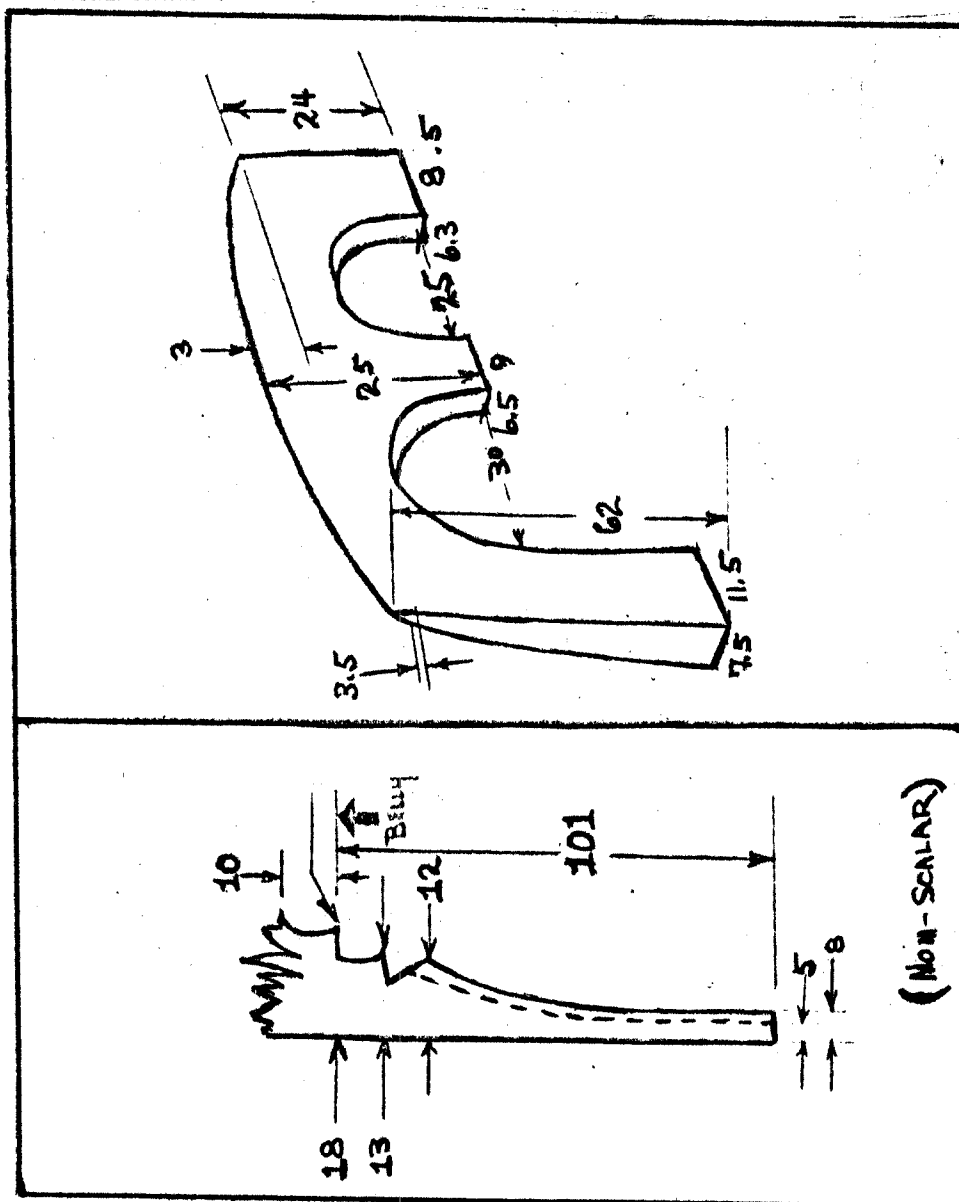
Detail, lower end of fingerboard (left); bridge: London Chanot
